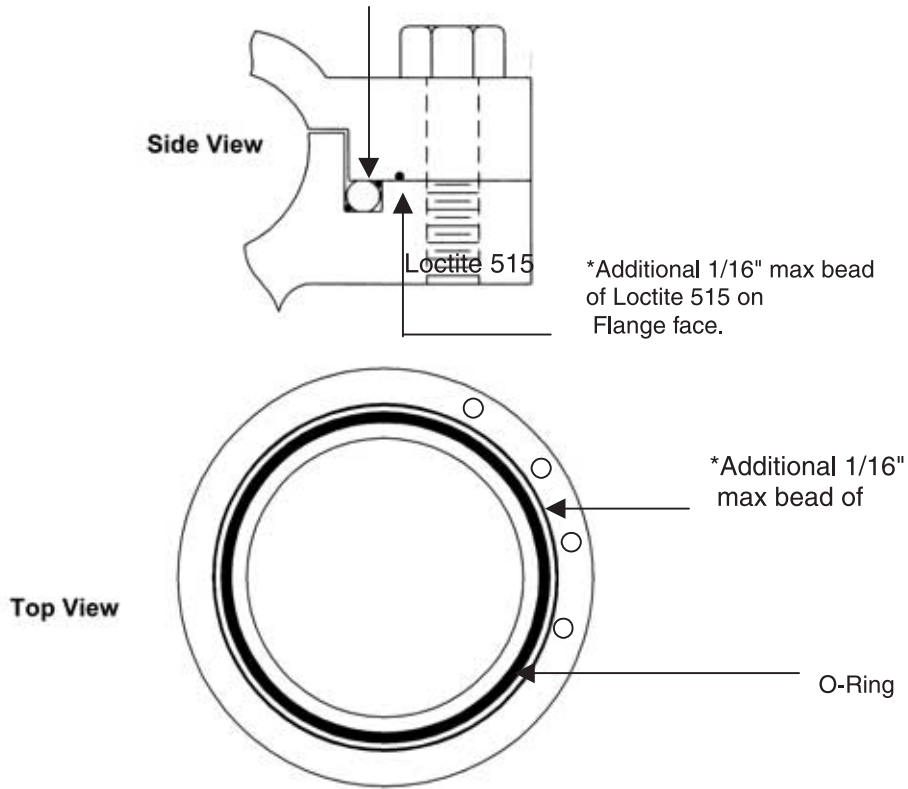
Bolt Connection Modified for Jack-Bolt Hole
